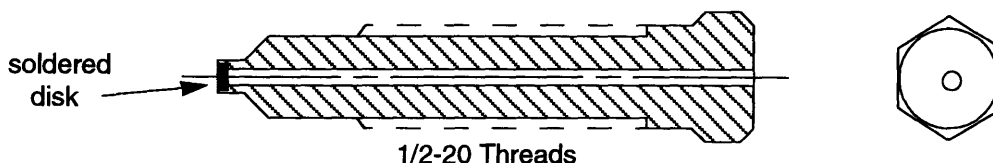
Schematic of the rupture disks installed in the flanges.
